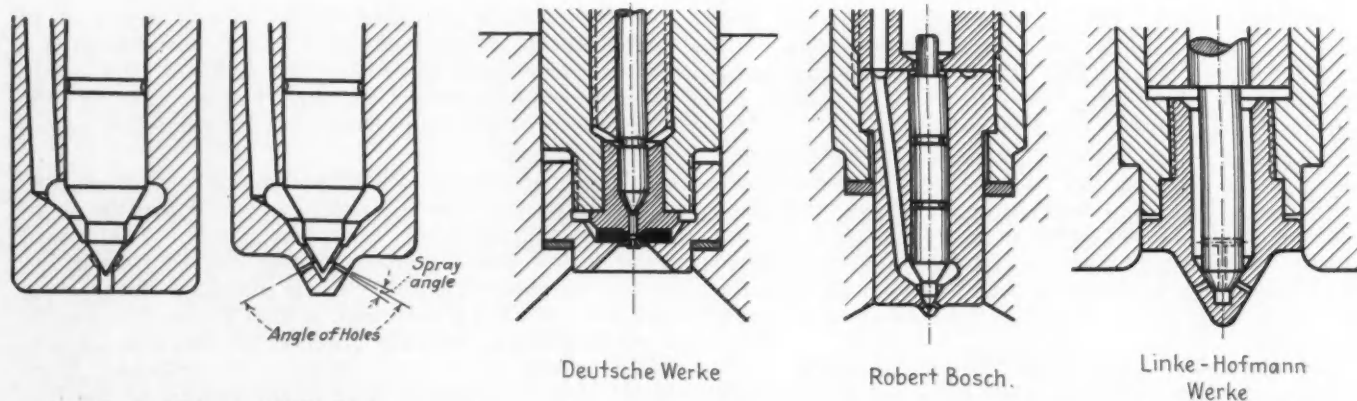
MULTIPLE-HOLE NOZZLES, HYDRAULICALLY OPERATED
